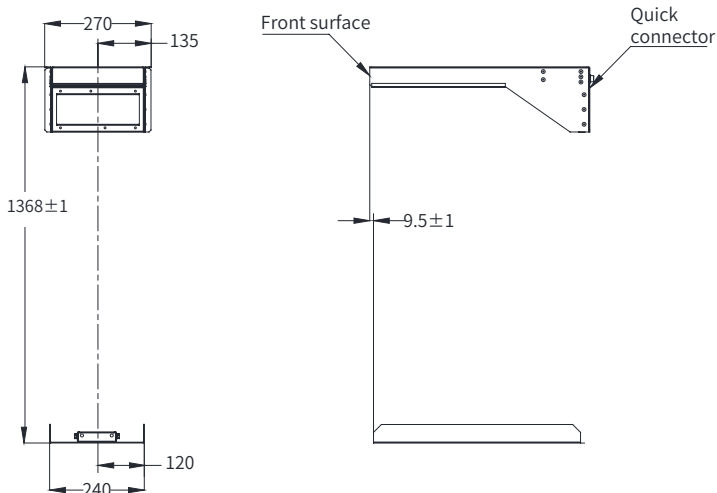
Clearance requirements for the relative positions of the upper and lower parts of T2 quick mounting kit (unit: mm)
